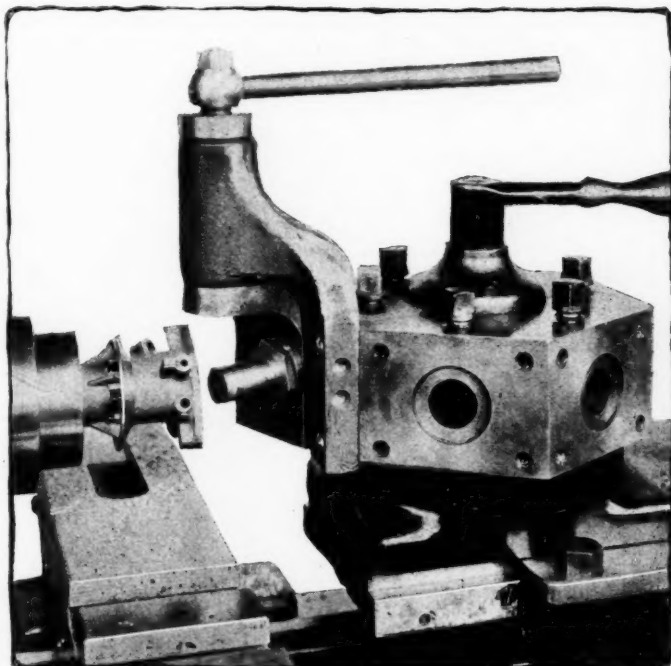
Tool for cutting radius in body for the travel of butterfly valve
